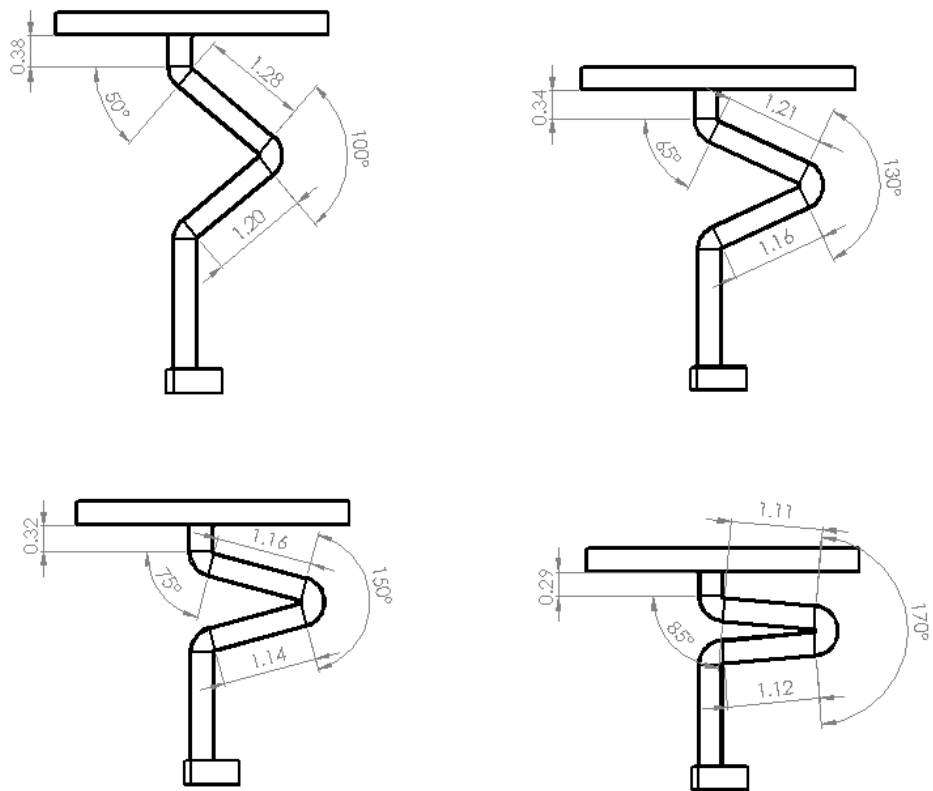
CAD drawing of Concept 2B: metal forming (laser cutting) after bending with adjustable lengths. From top left to bottom right, the TORPs are 4.5, 4.0, 3.5, 3.0 mm in length.
